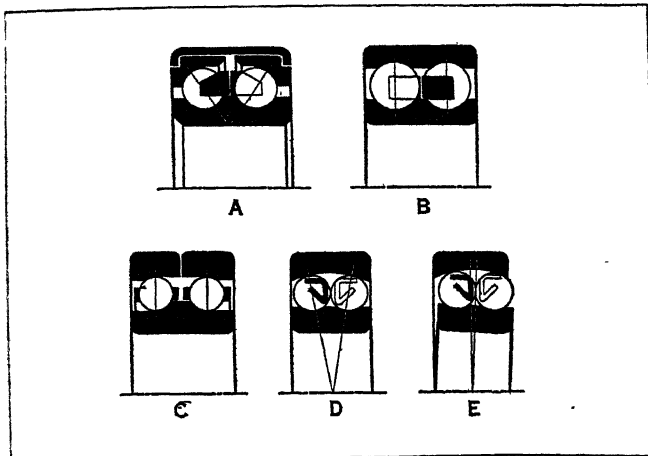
DIAGRAMS OF SECTIONS OF DOUBLE ROLL BALL BEARINGS
